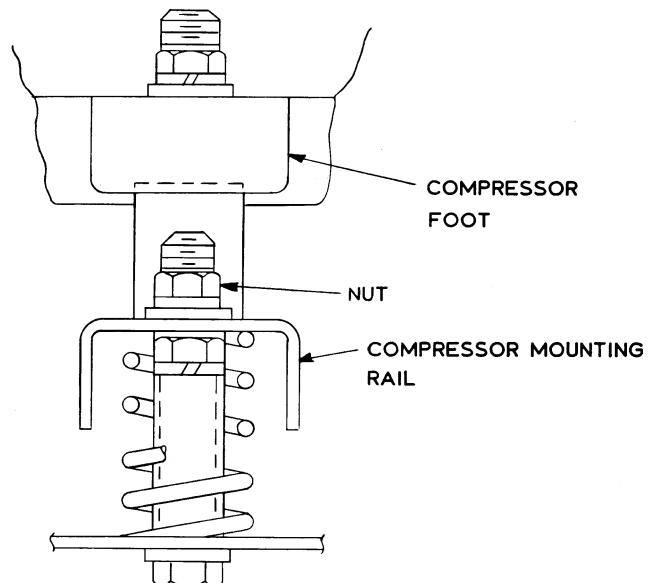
Front View of Compressor Mounting Rail Assembly — Size 105 Units
